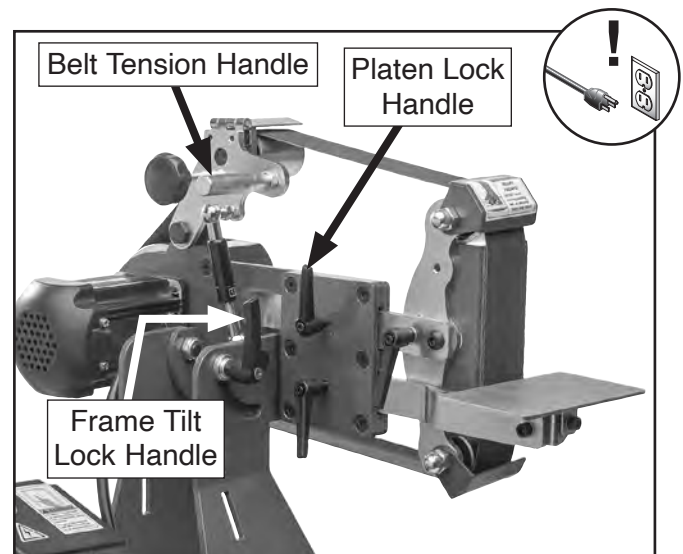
Location of platen lock handle, belt tension handle, and frame tilt lock handle.
